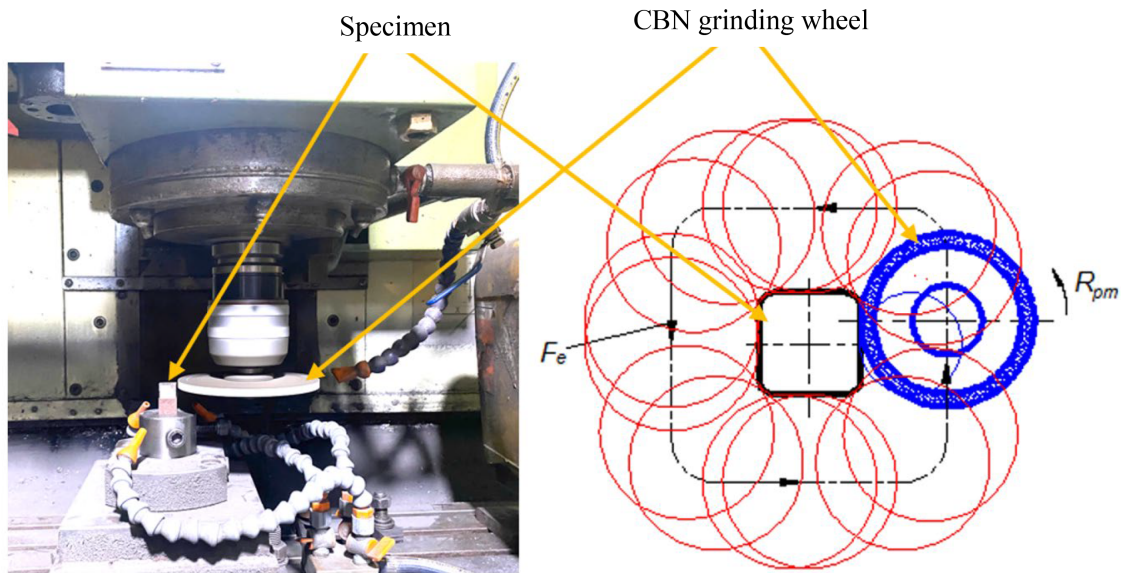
Experimental setup for grinding HARDOX 500 steel using a CBN grinding wheel
